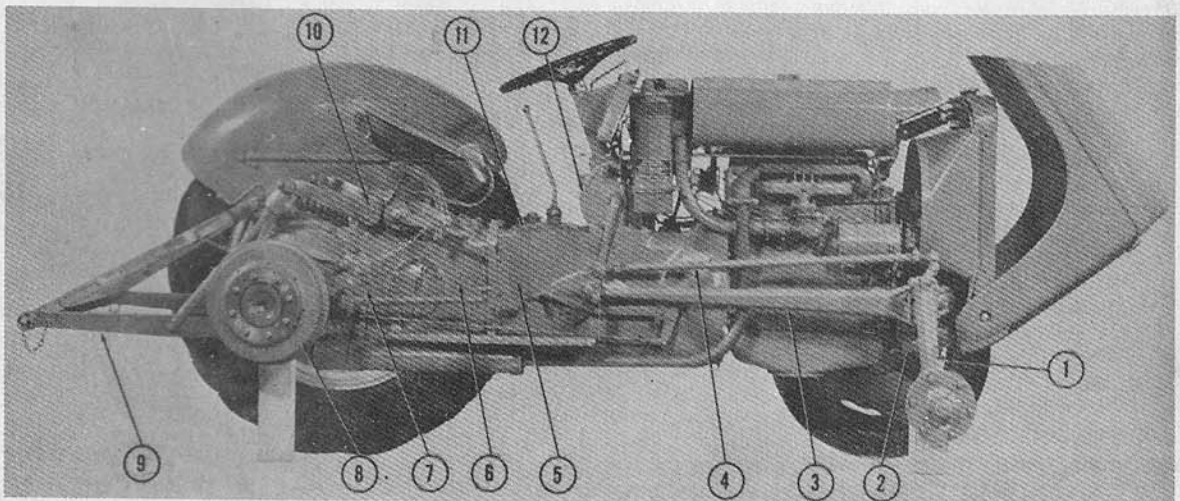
Model TO20 tractor, right side view. TE20, and TO30 are similar.
